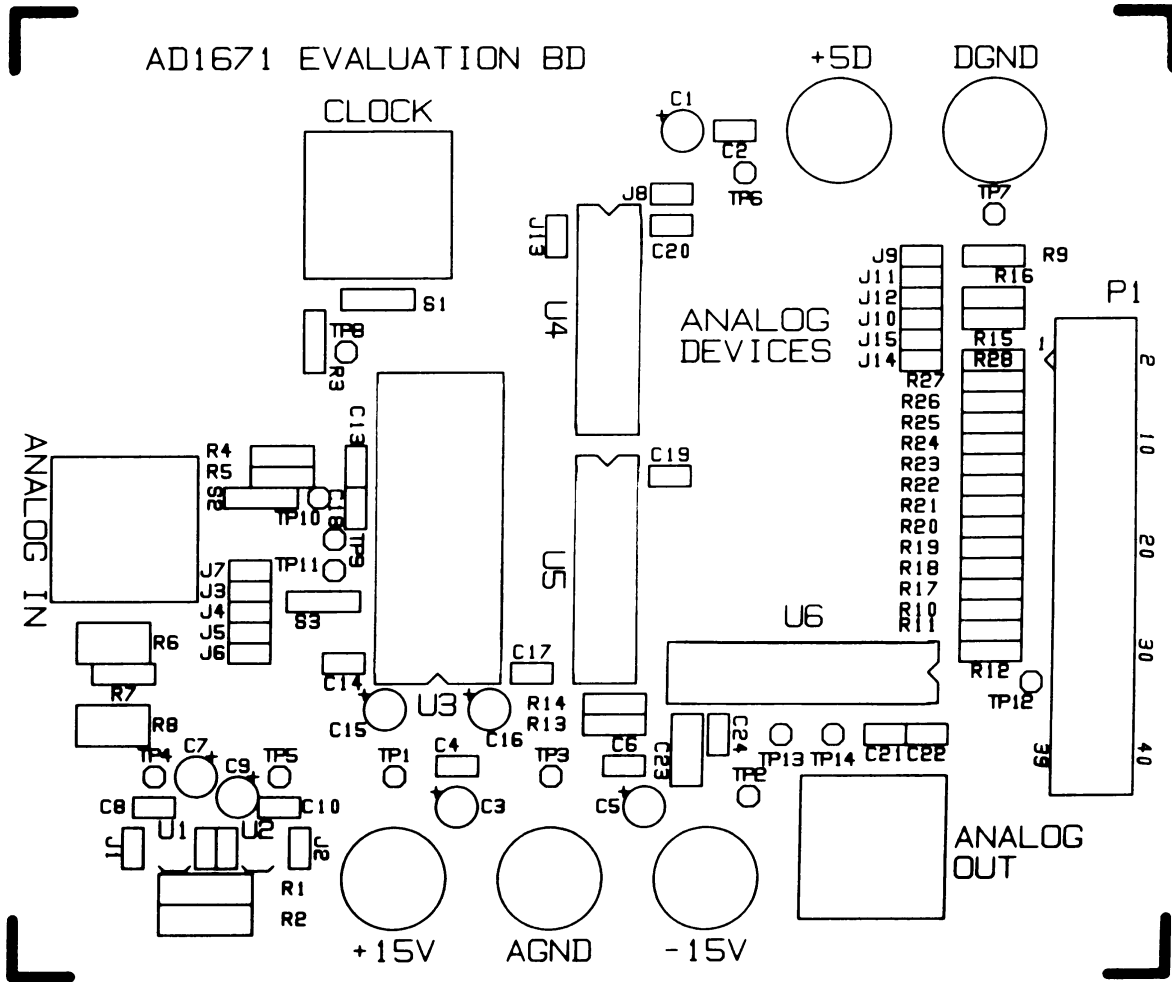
AD1671/EB PCB Layout—Silkscreen Layer
